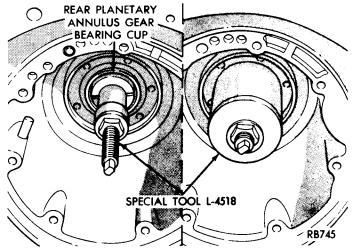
Remove Rear Planetary Annulus Gear Bearing Cup
